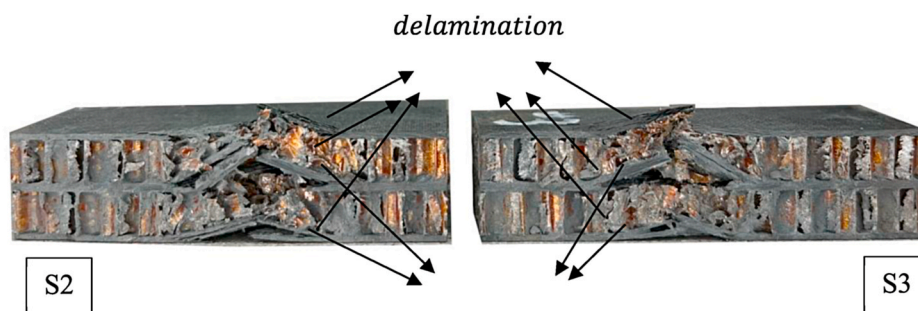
Side view of the sandwich composite panel – Designs S2 and S3 - after impact.
